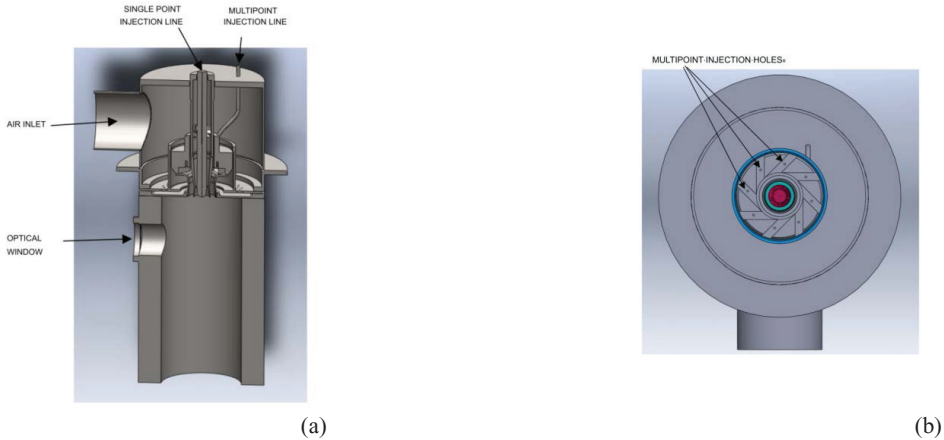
(a) Green Engine burner scheme; (b) Details of the multipoint injection holes.
